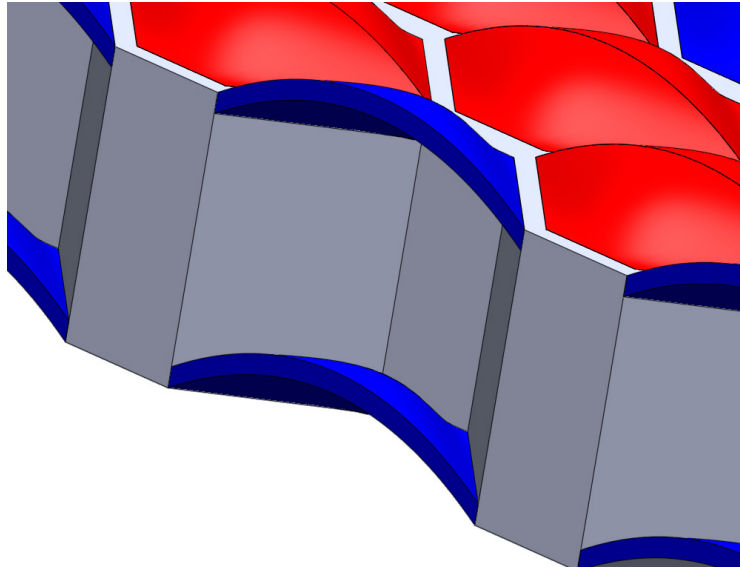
SMP/Honeycomb Skin Geometry Showing Unfilled Core and SMP Face Sheets
